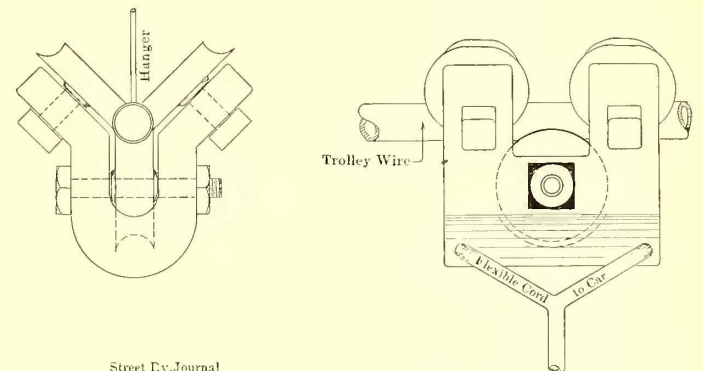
SIDE AND END VIEWS OF TROLLEY
